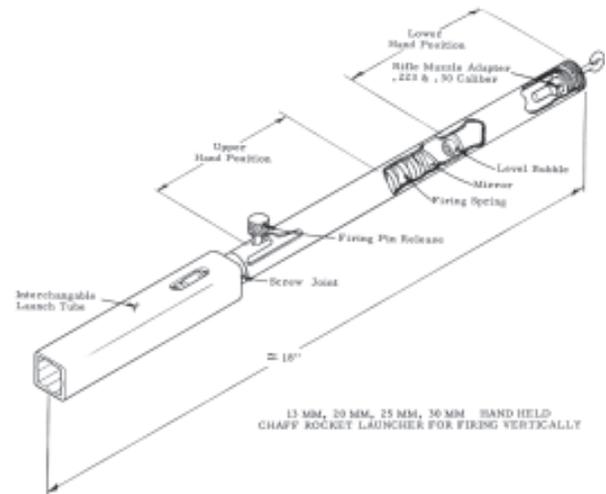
Multi-caliber Gyrojet flare launcher. MBA drawing.
